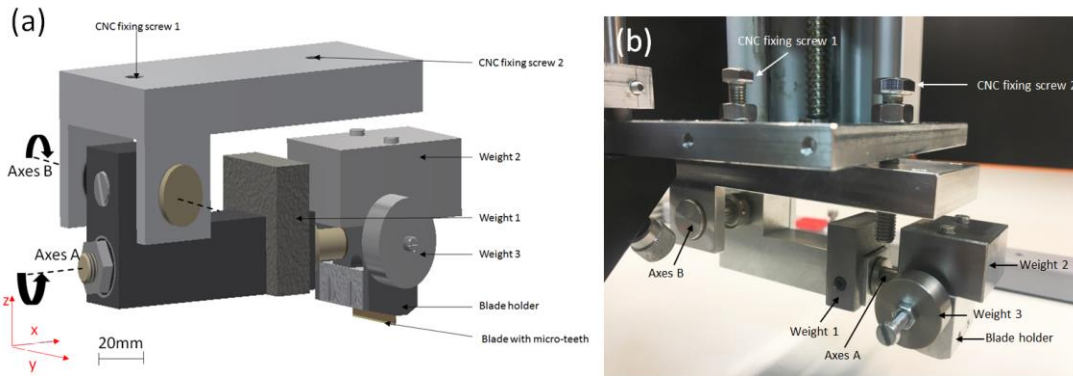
(a) A schematic design of the head which is installed on a CNC machine with the blade. (b) The fabricated head based on the design.
